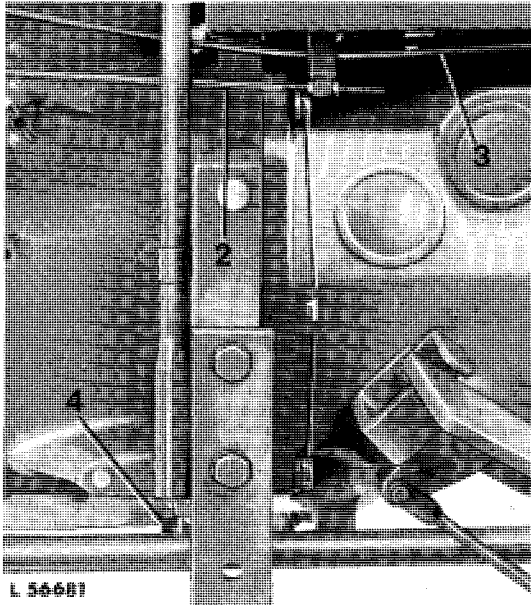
Separating between Engine and Clutch Housing, L.H. Side
